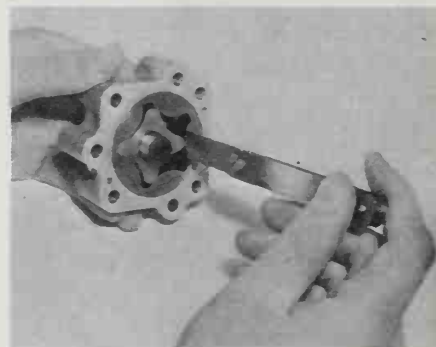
Measure clearance between inner and outer oil pump rotors as shown. Desired clearance is 0.11-0.16 mm.
